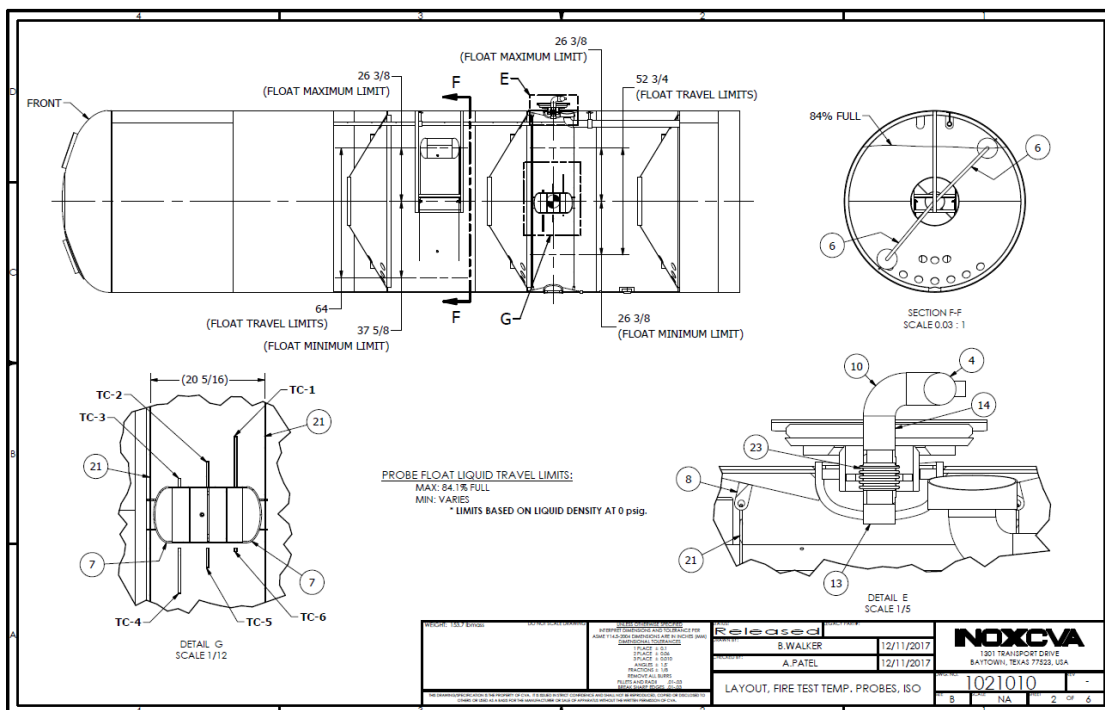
ISO Tank Showing Details for Central Floats and Top Outlet Connection for Wires (provided by CVA)
